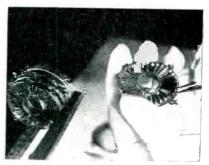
A multiplier wheel being prepared for assembly in jig shown at left
